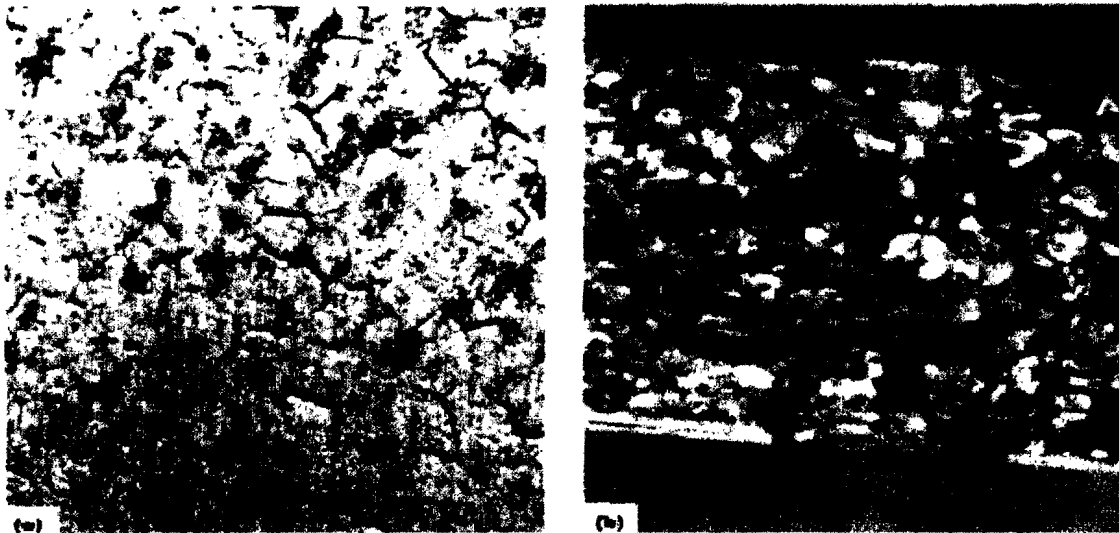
Hydrogen Flaking. Left – Flakes on polished cross section of an alloy steel bar. Right – Fracture surface polished containing flakes
